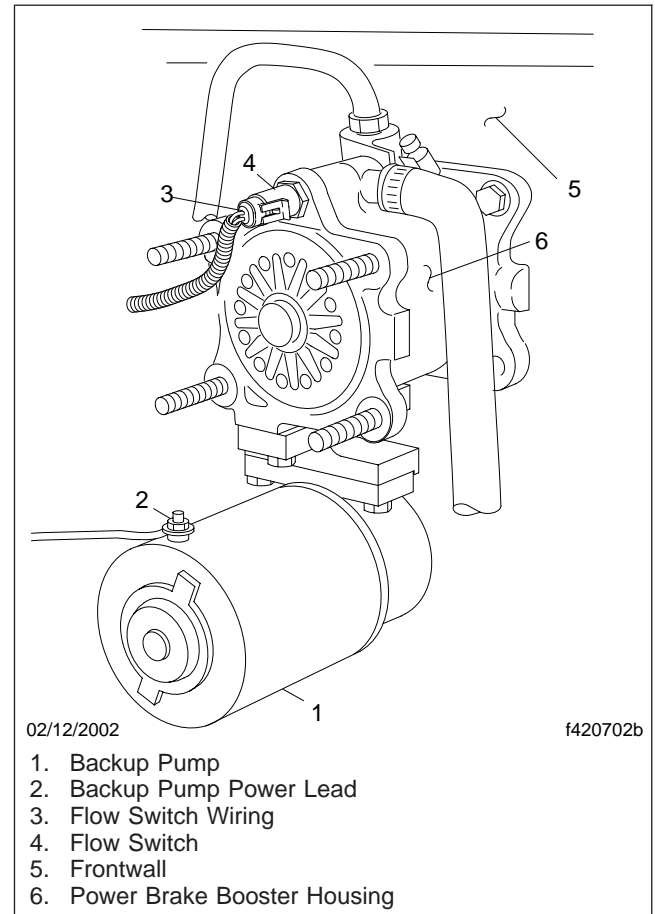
, Backup Pump Assembly (actual appearance may vary)
